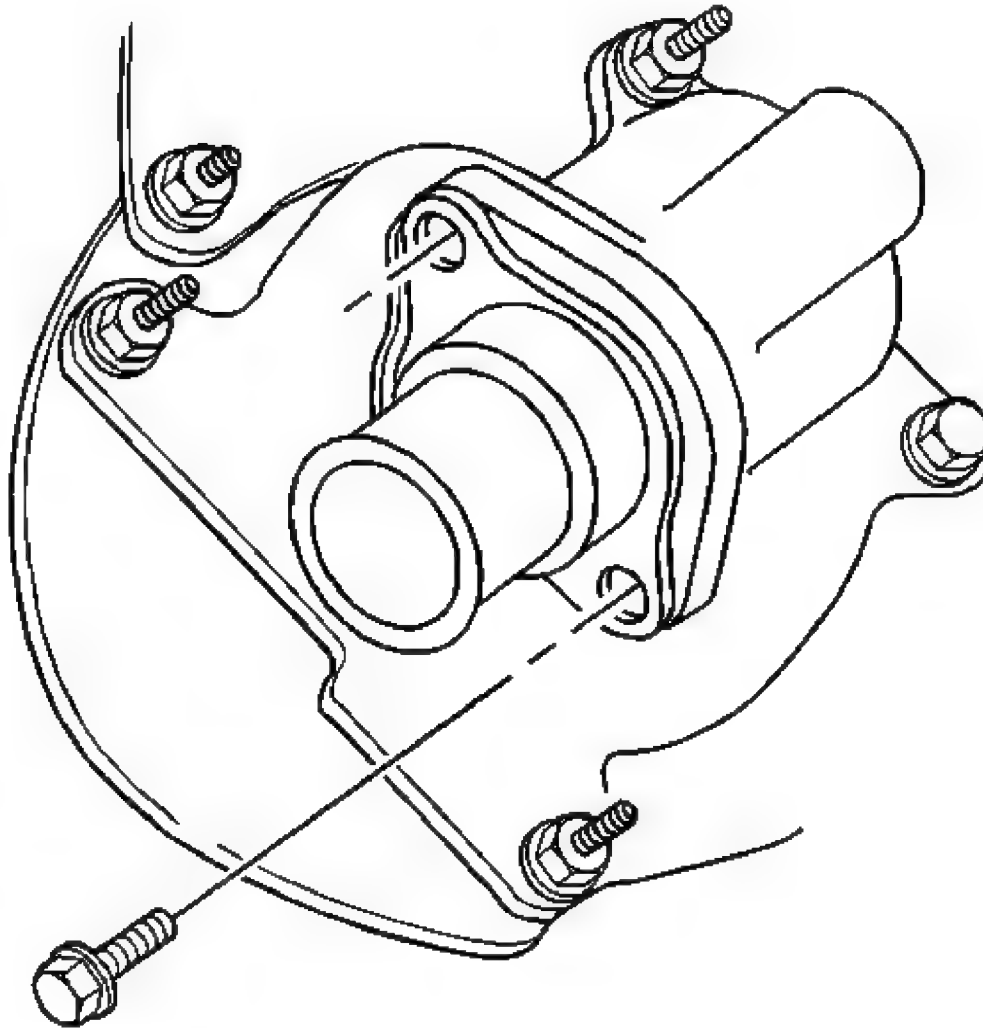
Identifying Thermostat Housing/Water Pump Inlet Bolts
